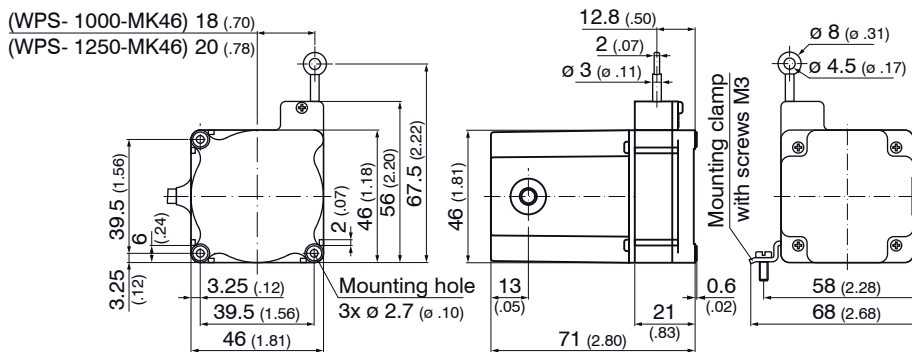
Dimensional drawing WPS- ... -MK46-CR, with potentiometer and radial cable, dimensions in mm (inches), not to scale
